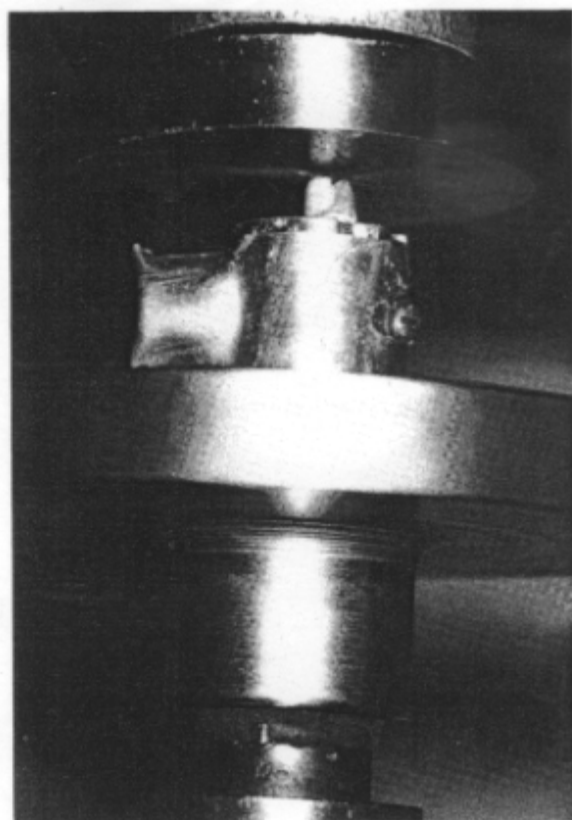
Assembled master die, design No. 3 sample, and Instron machine with transducer attached.
